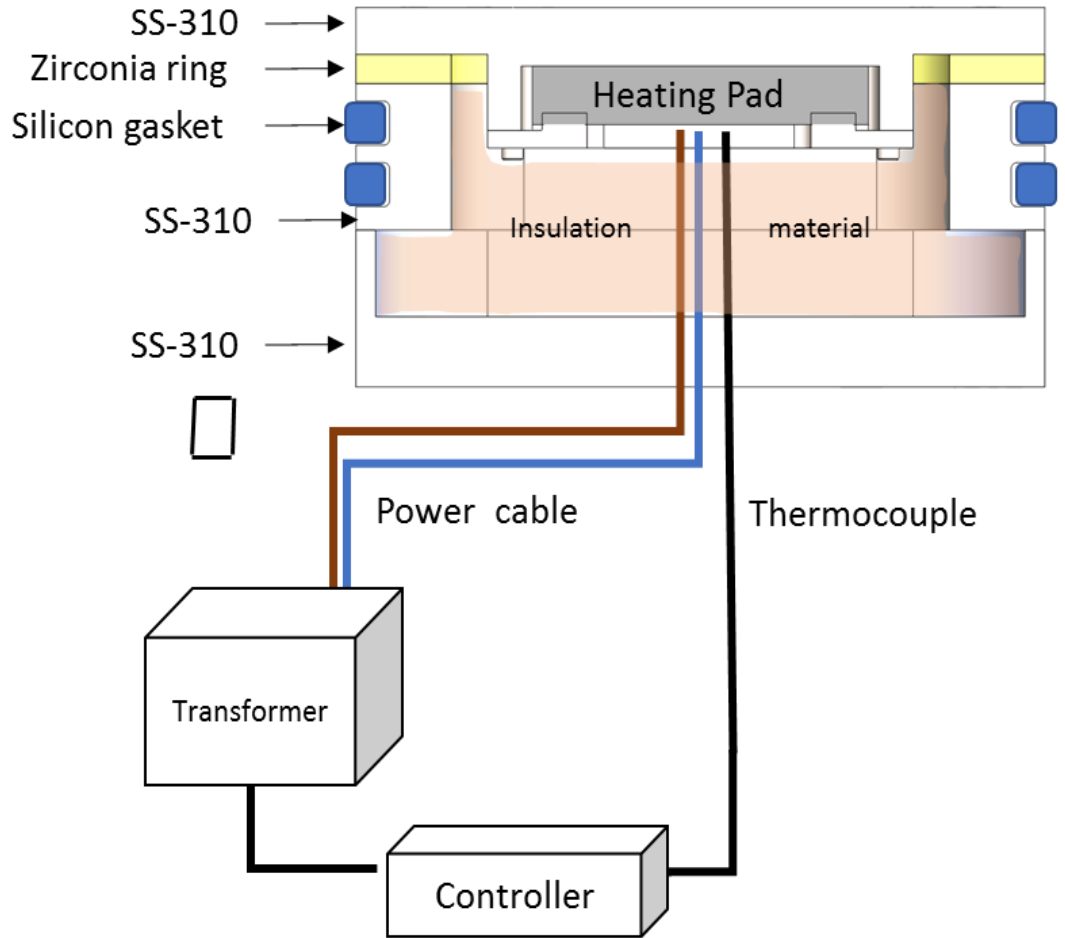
Detailed diagram of heated bed internal assembly and control schematic assembly
